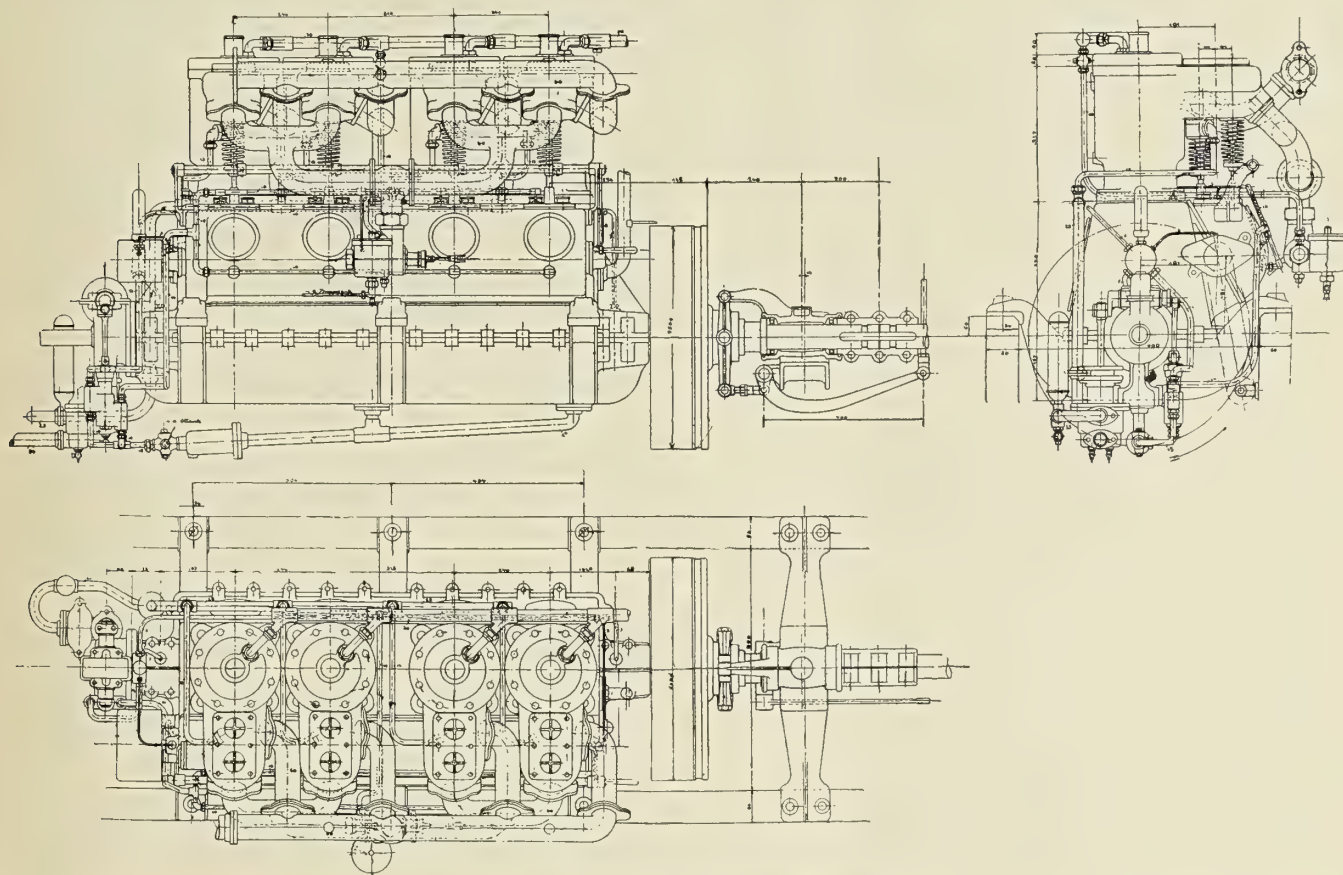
FORTY-HORSEPOWER "REVERSATOR" MOTOR.
